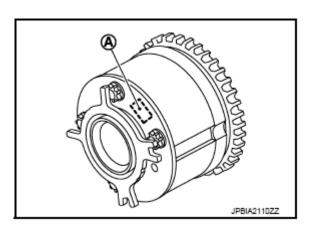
Locating Camshaft Sprockets Identification Mark Courtesy of NISSAN NORTH AMERICA, INC.
